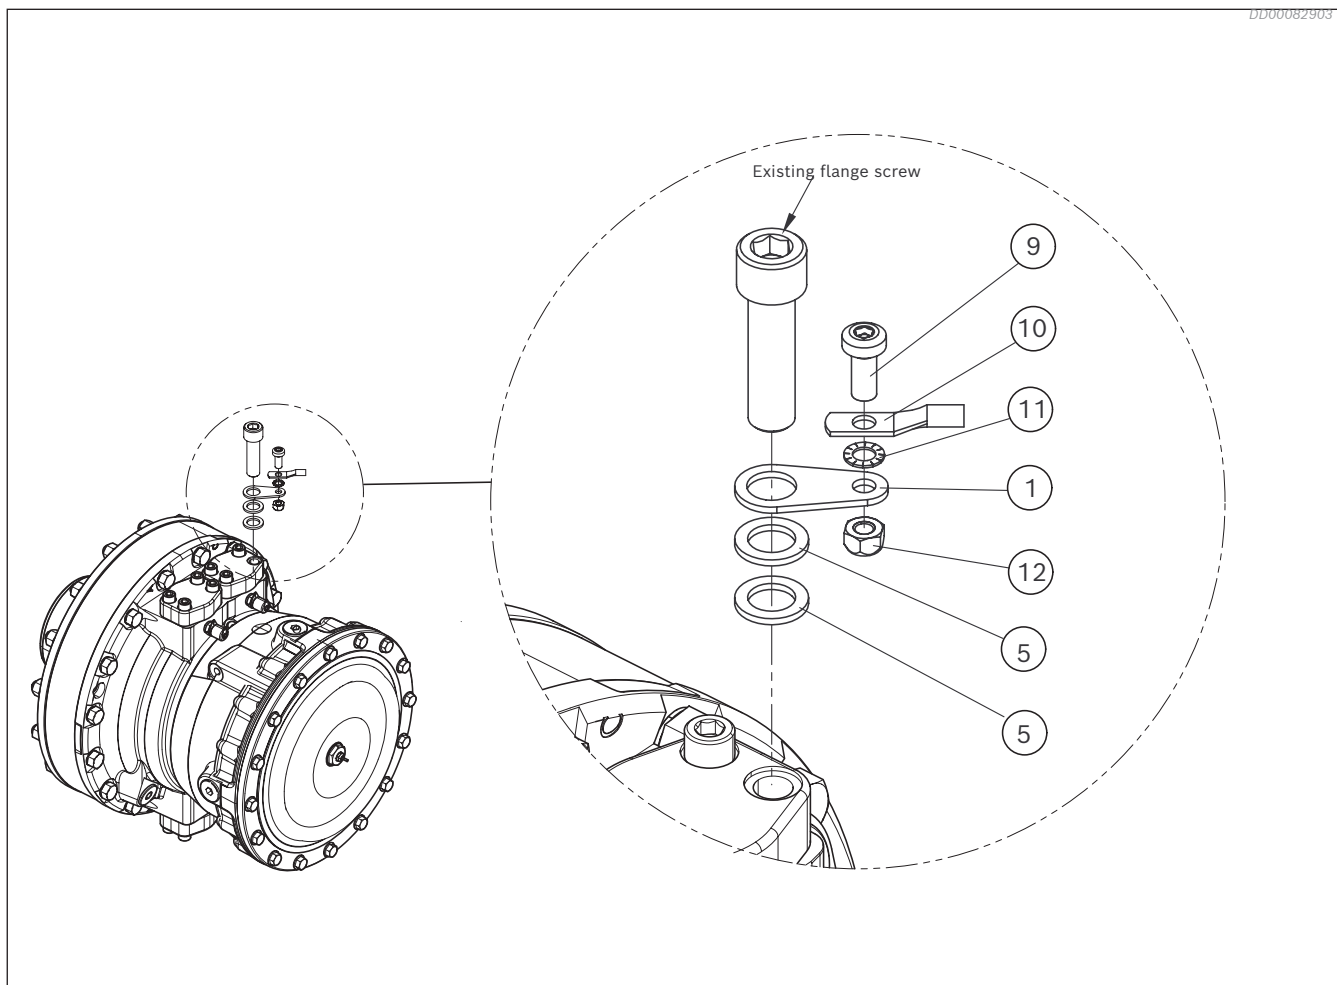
Grounding assembly details Hägglunds CA and MDA 5-10
